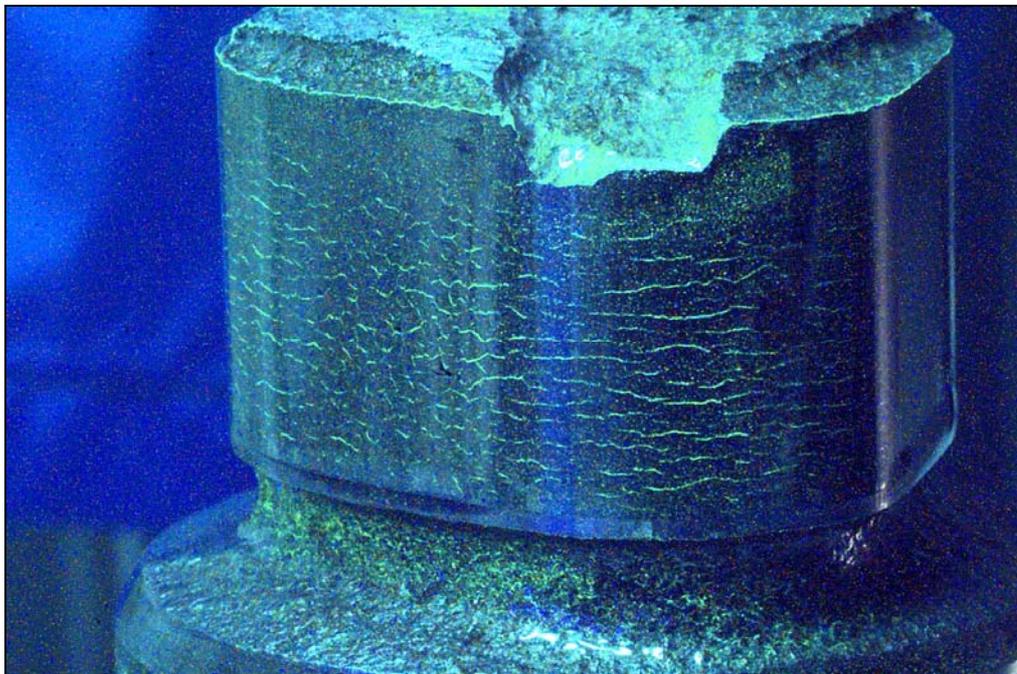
Close view of fatigue crack initiation from micro-cracks in the ground surface of one of the cams. Viewed under ultra-violet light, during magnetic particle inspection.
